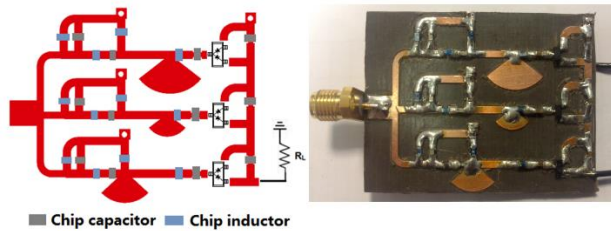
Topology and fabricated prototype of the proposed six-band rectifier. The size of the PCB is $3.5 \times 4.5 \text{ cm}^2$.
